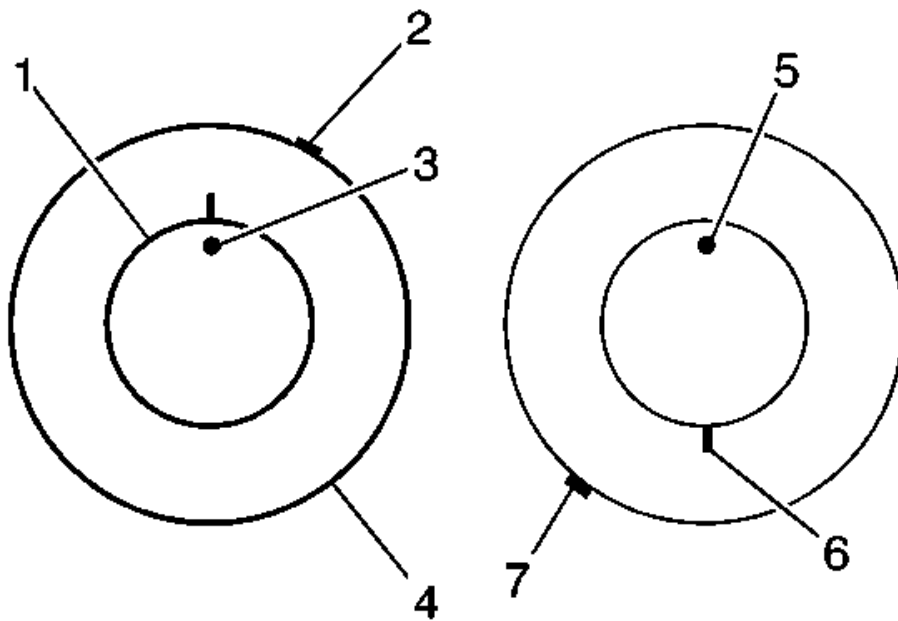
View Of Match-Mounting Tire-To-Wheel
